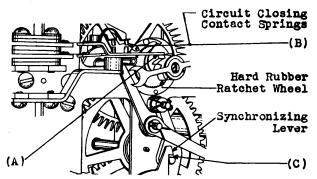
Circuit Closing Contacts and Ratchet Wheel
